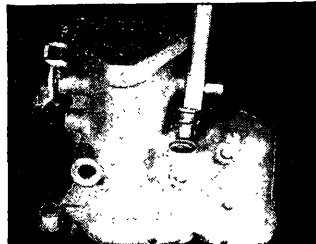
Install discharge and intake checks, strainer and plug. Use new copper washer before installing strainer and plug
